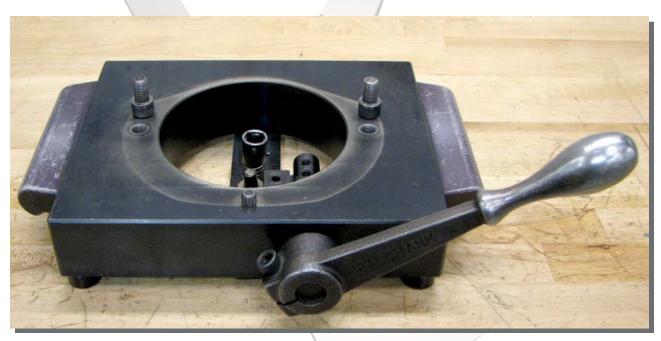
, Depth Of Cut Gauge Fixture, #GA410-CC51, without cartridge.
